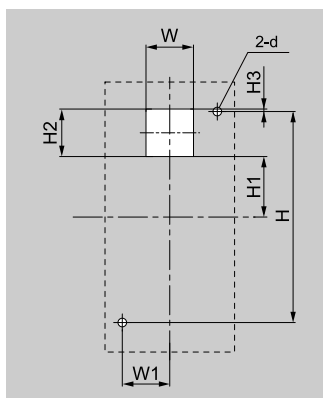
Panel Cut-out Dimensions to Attach Outside of Control Panel
